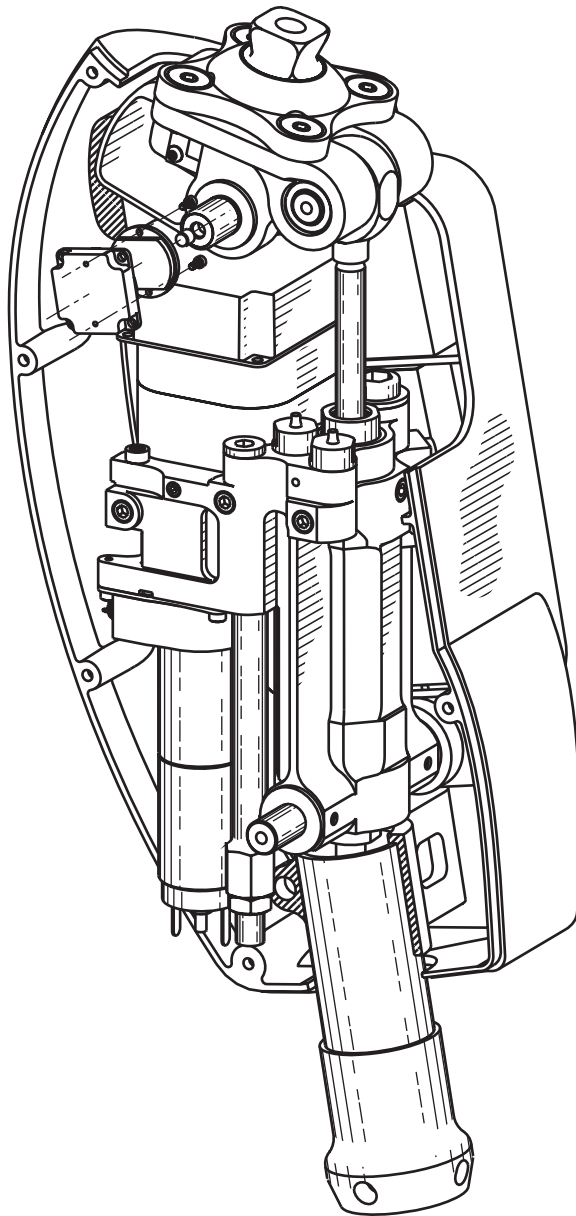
A cutaway view of the hybrid knee shows the placement of the manifold and actuator assembly in relation to thigh socket and ankle pylon connections.
